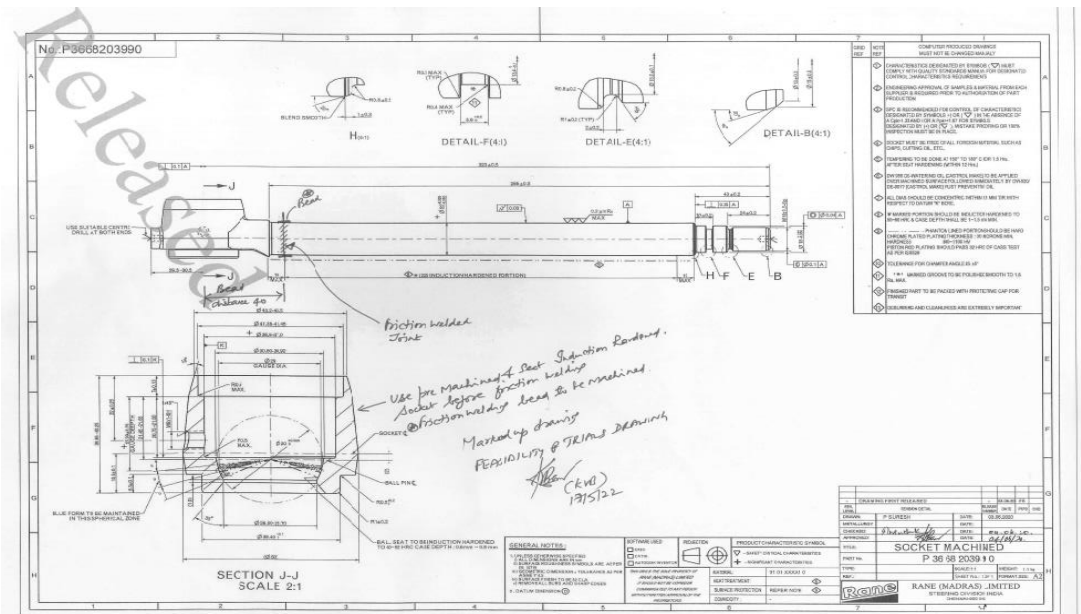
Piston Rod Friction welding Drawing.
